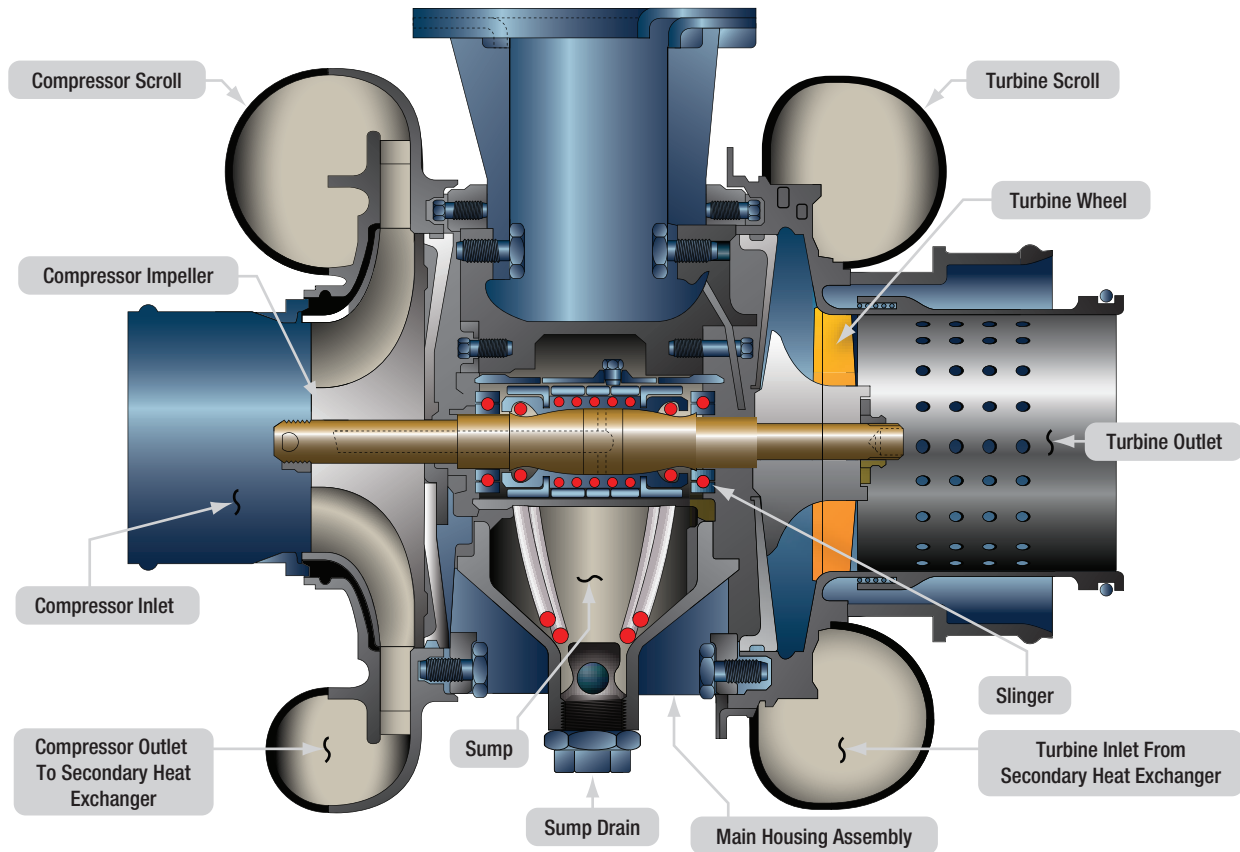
A cutaway diagram of an air cycle machine. The main housing supports the single shaft to which the compressor and turbine are attached. Oil lubricates and cools the shaft bearings.
